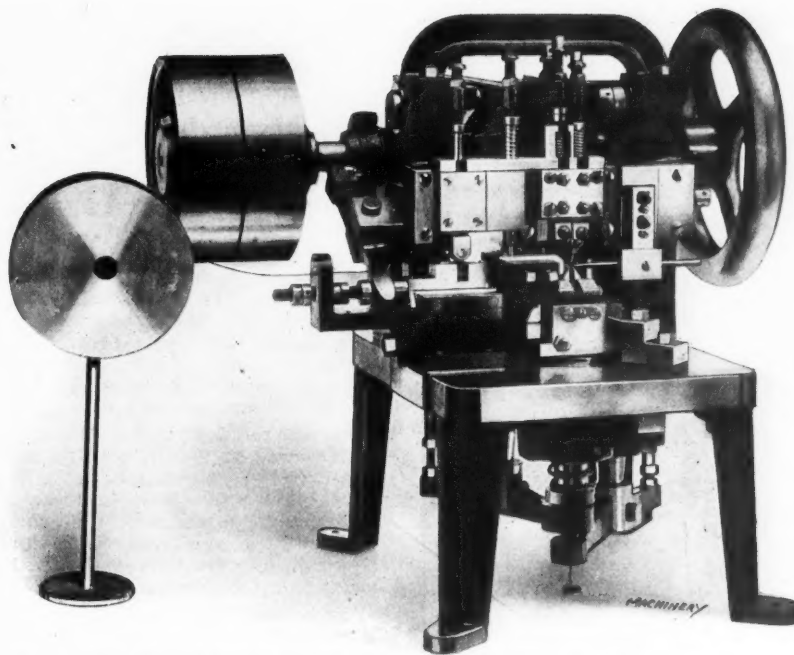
Front View of Lind Automatic Chain Making Machine, showing Stock Reel and Forming Tools
